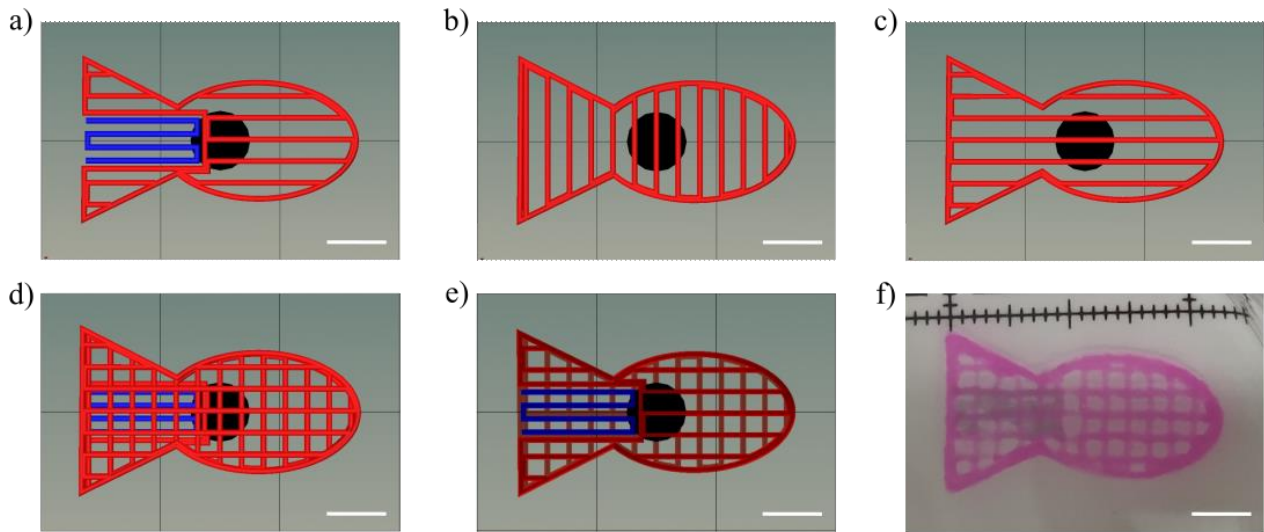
Preview of 3D printing path for a fish-shaped actuator, with passive ink (red) and active ink (blue). a) Bottom layer. b) Middle layer. c) Top layer. d) Top view of combined layers. e) Bottom view of combined layers. f) 3D printed fish model. The scale bar represents 0.5 cm.
